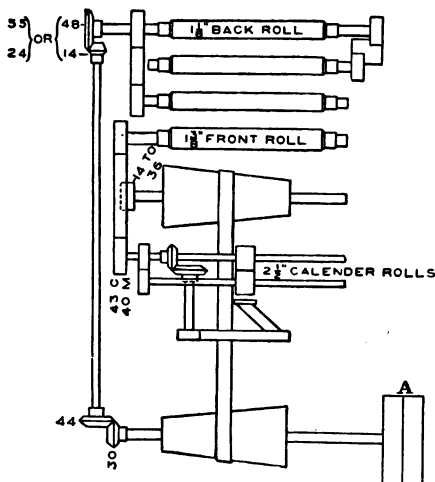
(b).—Diagram of Gearing of Coiler Railway Head.
